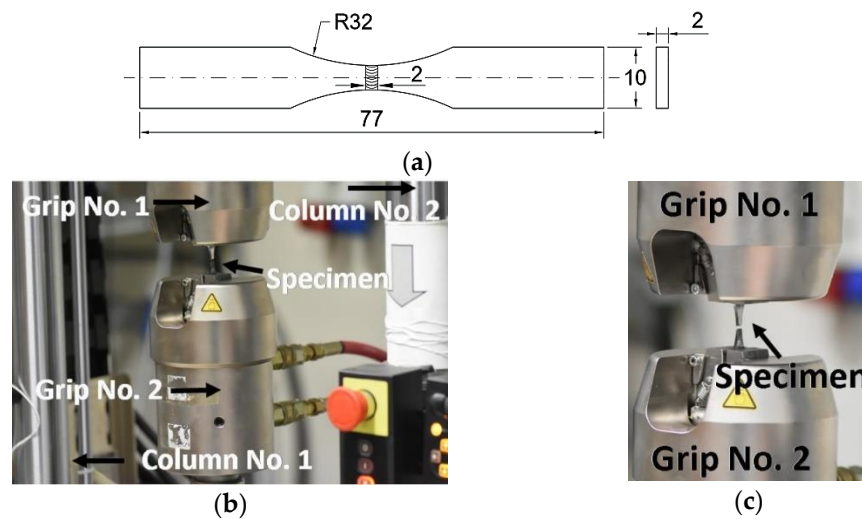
U-notched mini-specimen in the 8874 Instron testing machine: (a) shape and dimensions (in mm) of the specimen, (b) general view and (c) mini-specimen and grips.
